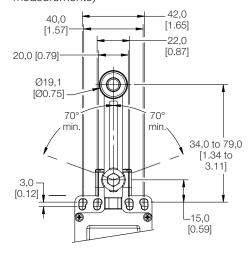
GXE Series Roller Plunger Dimensions mm [in] (refer to Figure 6 for additional
